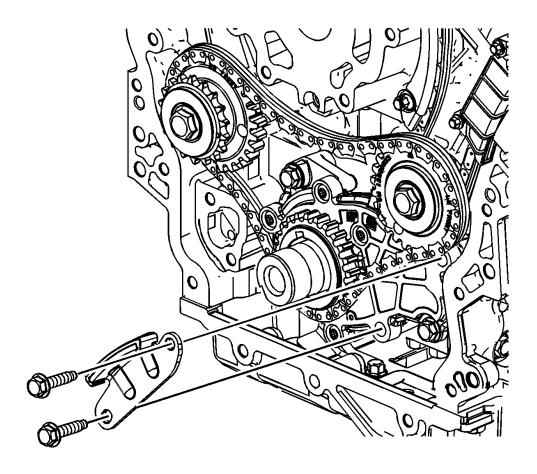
View Of Primary Camshaft Drive Chain Lower Guide Bolts Courtesy of GENERAL MOTORS COMPANY
